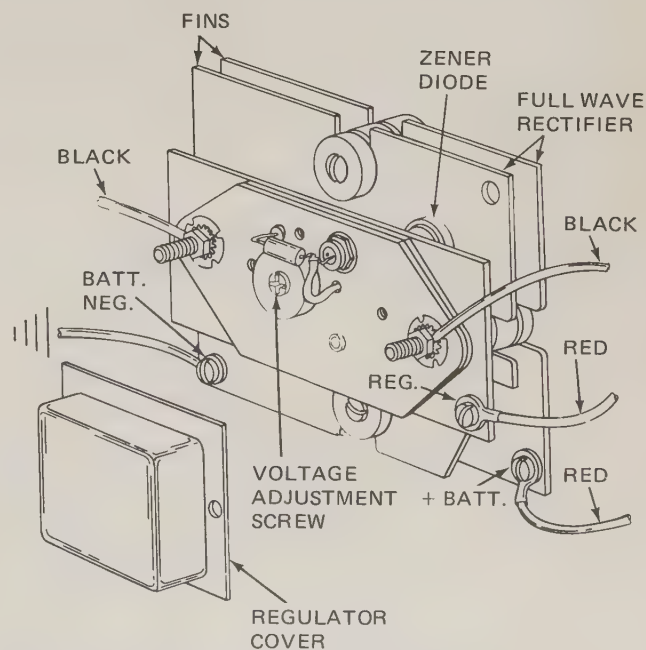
One type of solid-state regulator used to control the flywheel alternator. (Kohler Company)
